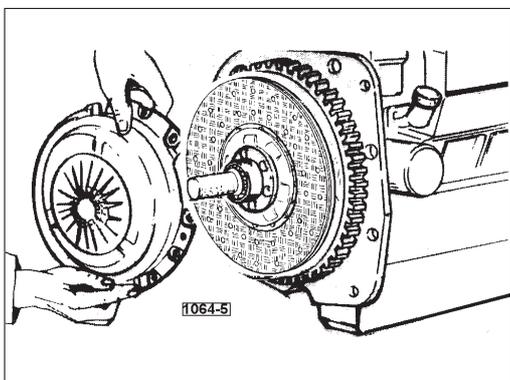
Installing clutch assembly through n. 5.9030.256.4/10 equipment.
